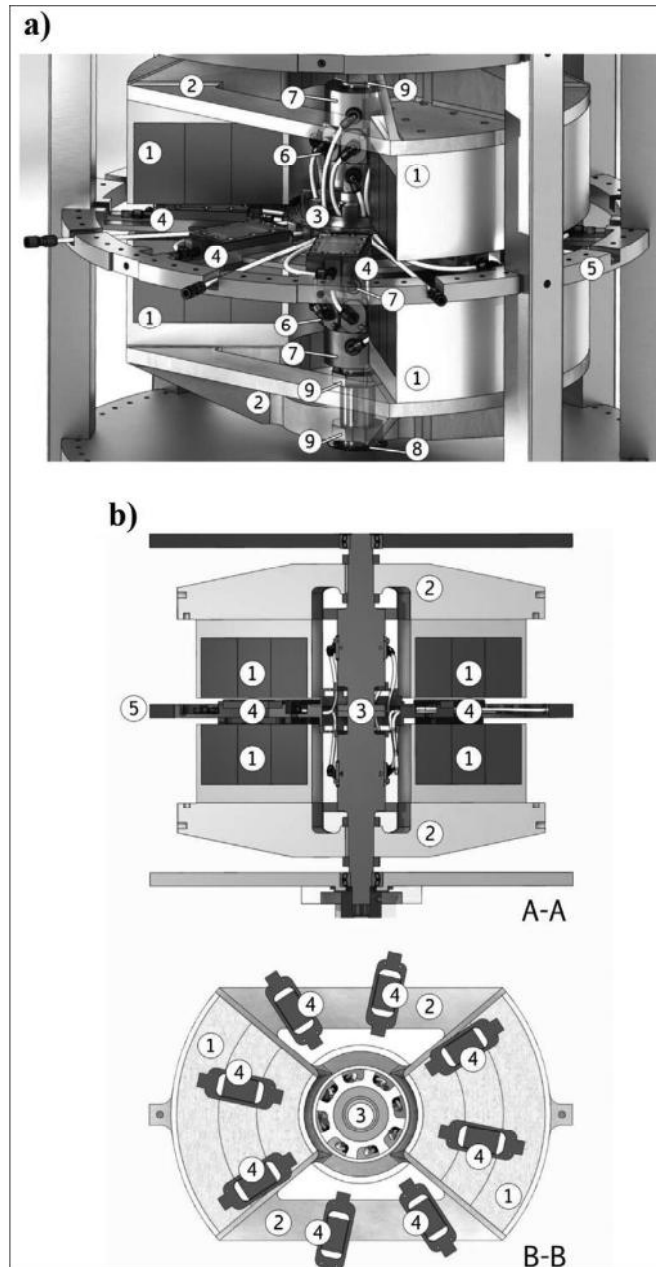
(a) 8Mag core details: 1) permanent magnet assembly; 2) mounting support; 3) shaft-rotary valve combination; 4) regenerator; 5) magnetocaloric wheel; 6) fluid manifold to/from regenerators; 7) fluid manifold to/from heat exchanger; 8) bearings; 9) adjustable rings. (b) Longitudinal (A-A) and axial section (B-B) of the device core.
